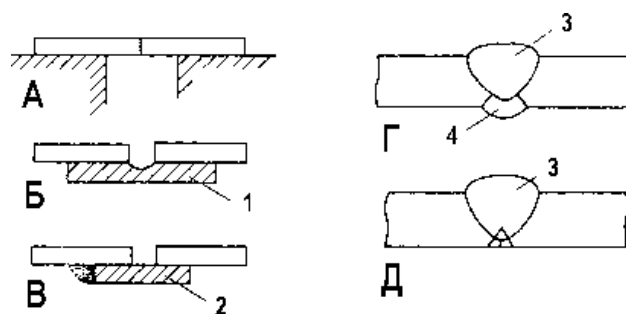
Kinds of point welding electrode position (LO nemposition)
